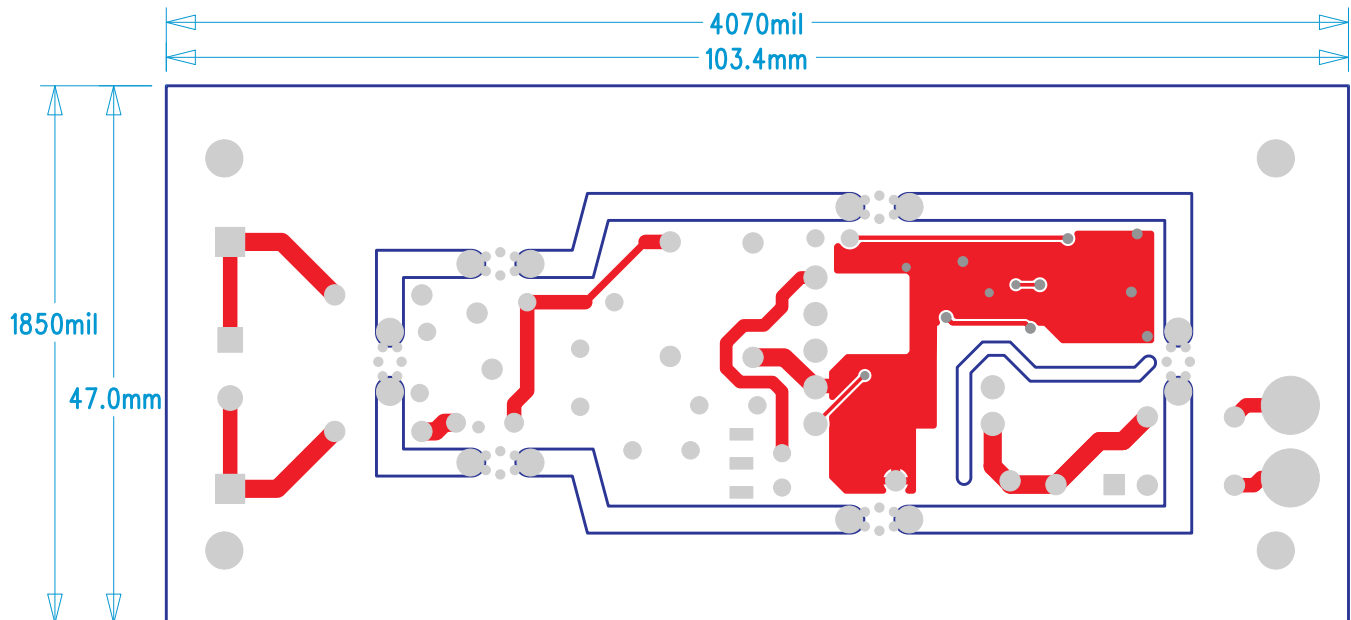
LM3447-A19-120VEVM Top Layer Copper (top view)
